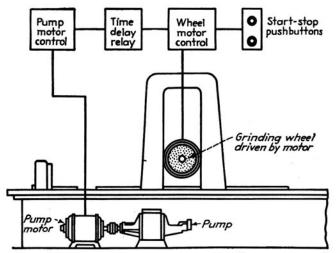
Large grinders use pumps driven by separate motors. Pump motor need not be in operation when grinding wheel is not running, but it is sometimes desirable to allow wheel motor to coast to rest before shutting down pump motor. This can be done electrically by means of time delay relay to permit pump motor to operate for predetermined time after wheel motor is shut down. For the starting sequence, an arrangement similar to that in Fig. 462 may be used.
